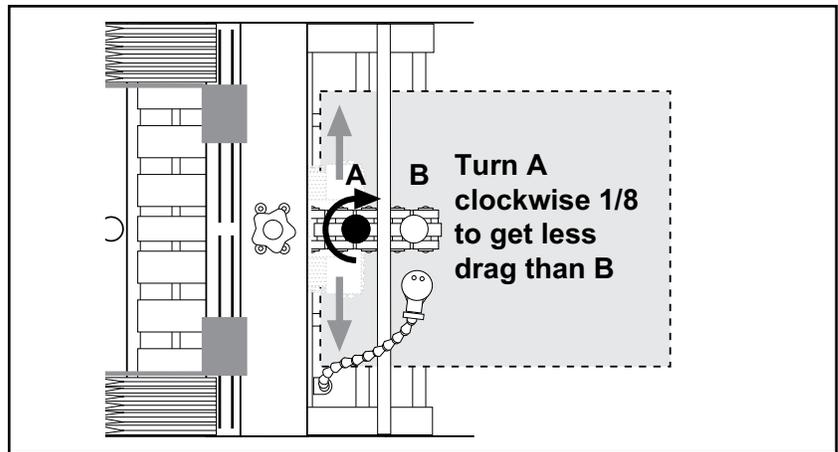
Turning Knob "A" Clockwise to Get Slight Drag
